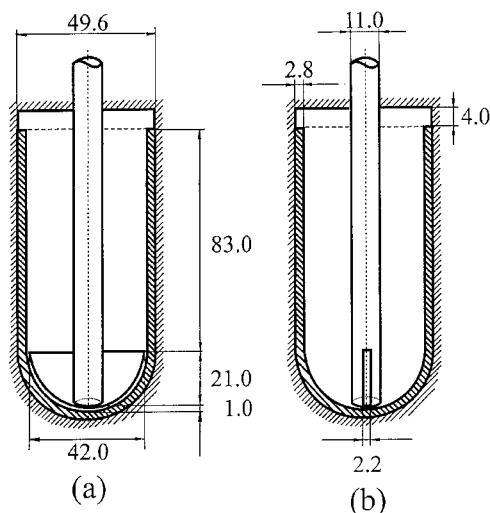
Drawing and dimensions of the impeller and the glass liner: (a) front view and (b) side view.
